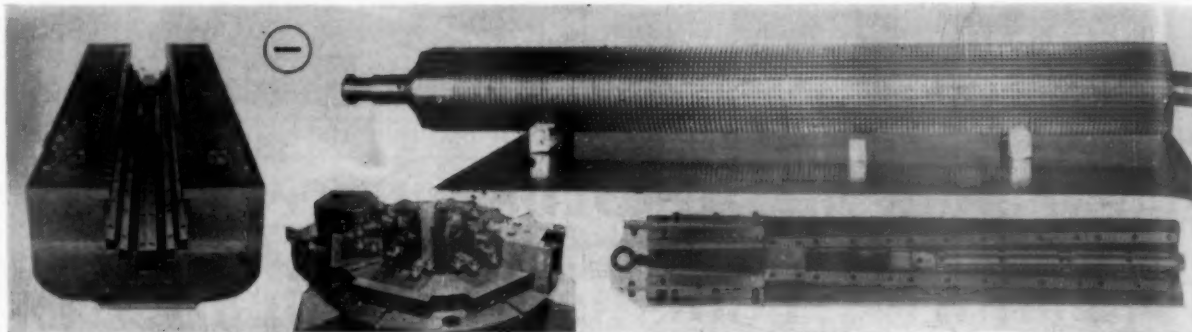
, showing assorted broaches. At left, a tunnel-type broach with holder; at lower center, a stationary broach for vertical operation; and at top, a pull broach designed to cut a 44-tooth involute spline in one pass. This "giant" is 9-3/16 in. O.D. and over 7 ft. long; the others in proportion. Size range can be judged from the encircled line, which represents a midget broach.
